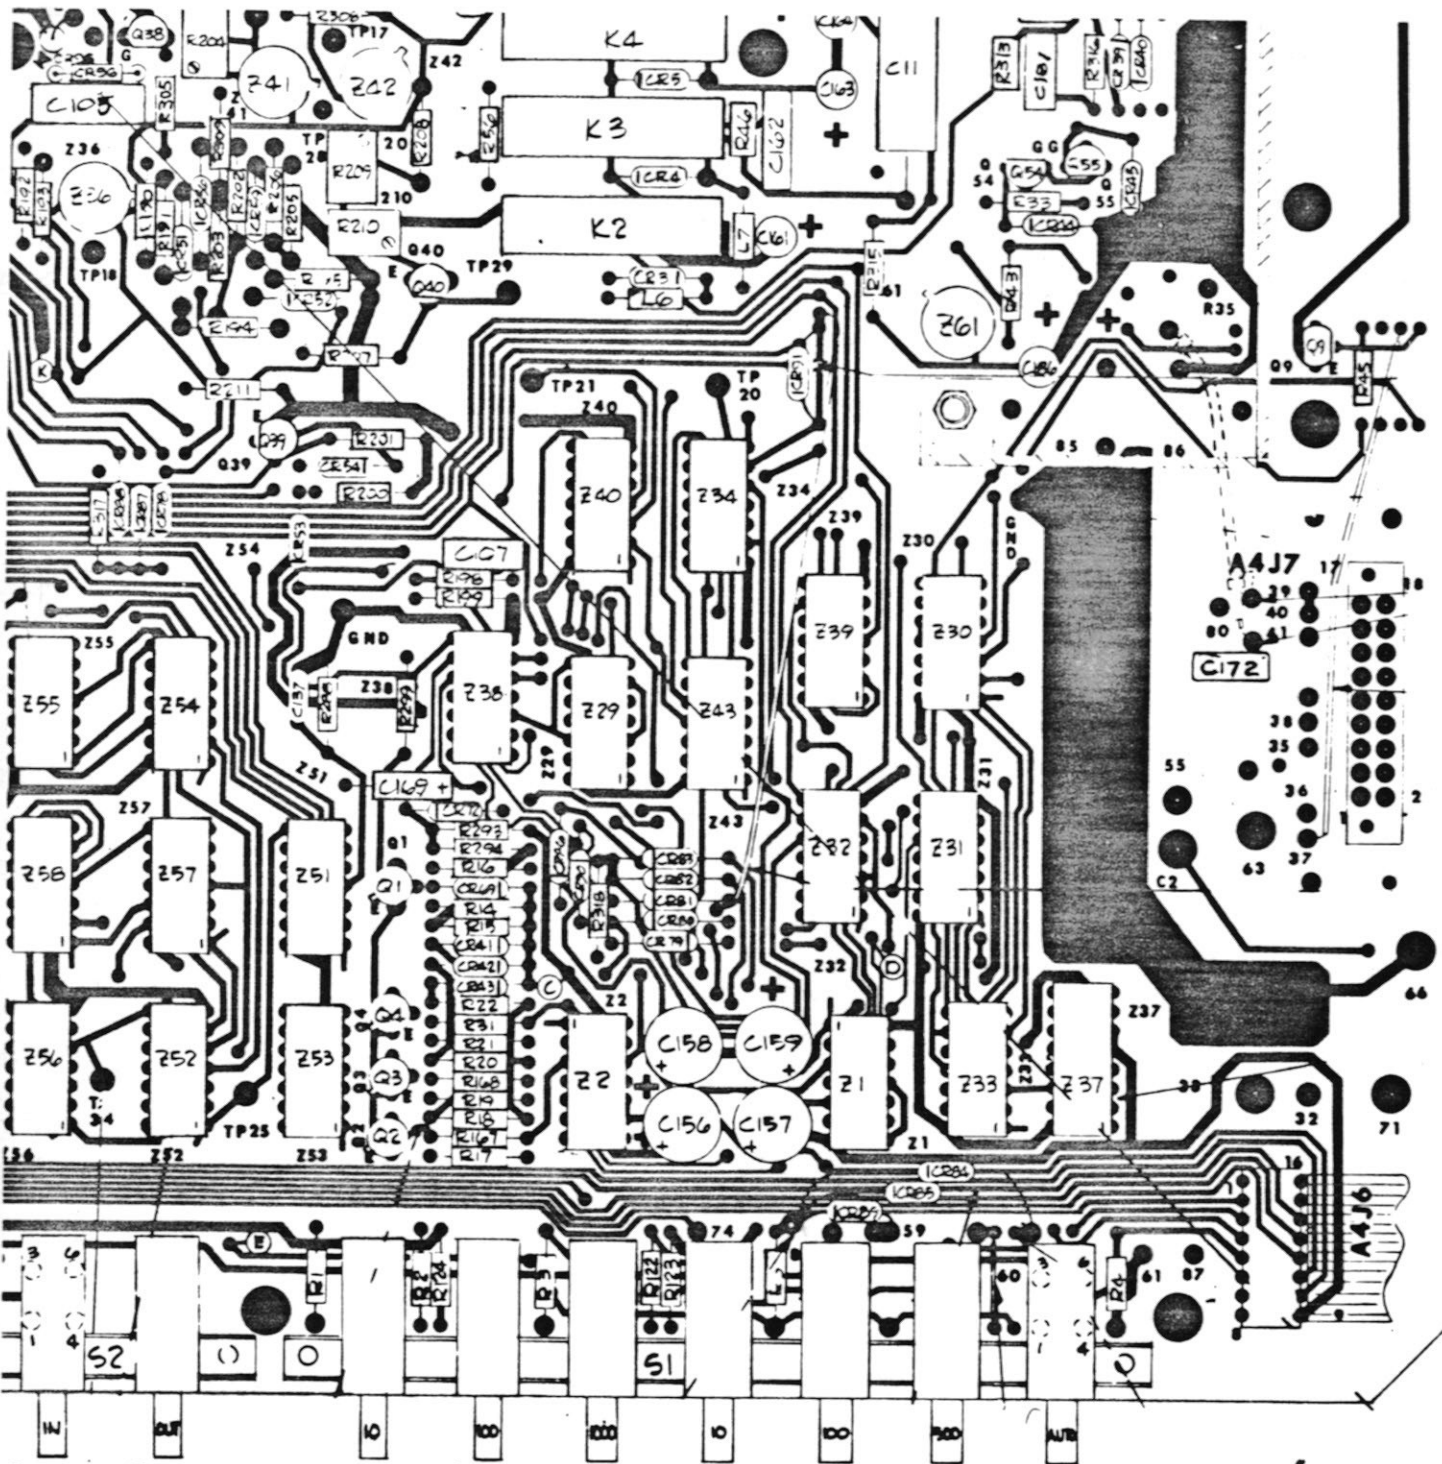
Main Board, Parts Locator (Sheet 4 of 4)
